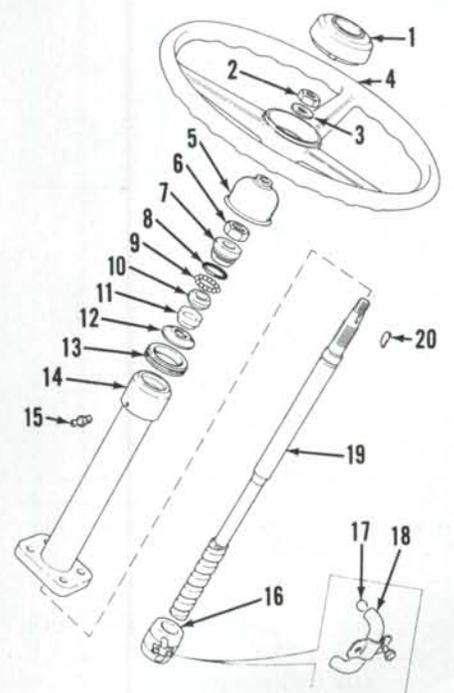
Exploded view of steering column and related parts for 1190 models equipped with manual steering.
